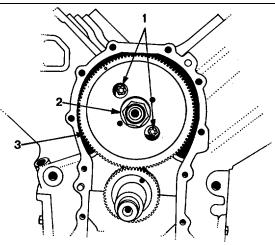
Camshaft Thrust Plate Mounting Bolts
